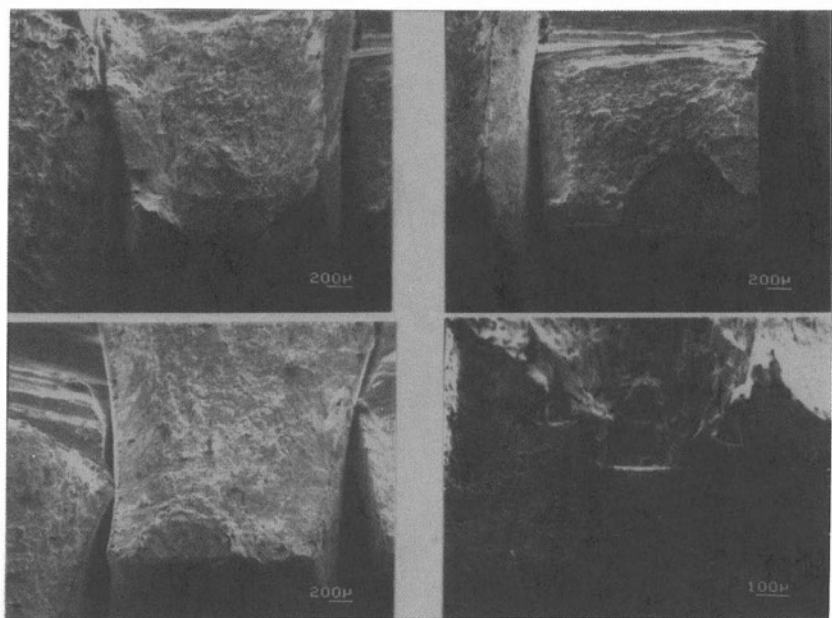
Examples of cracks seen in the bolt holes of compressor discs.
